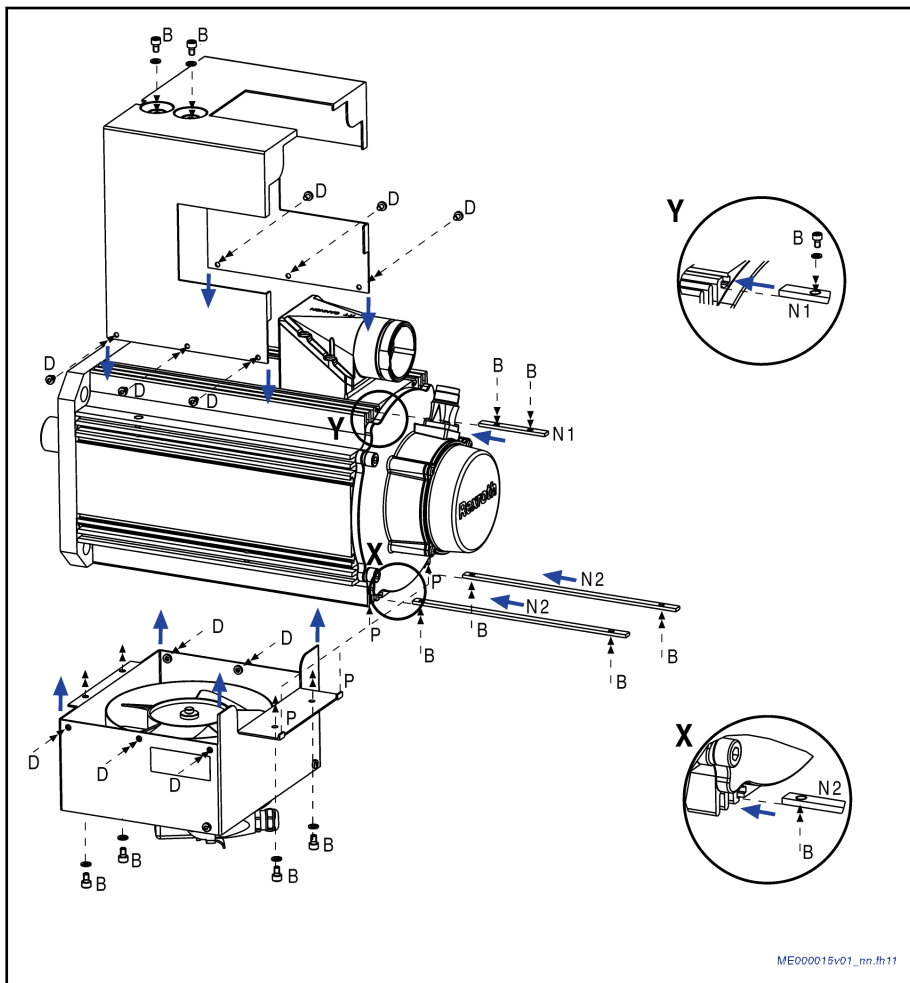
Assembly Fan Unit Radial, Flange Dimension 192
